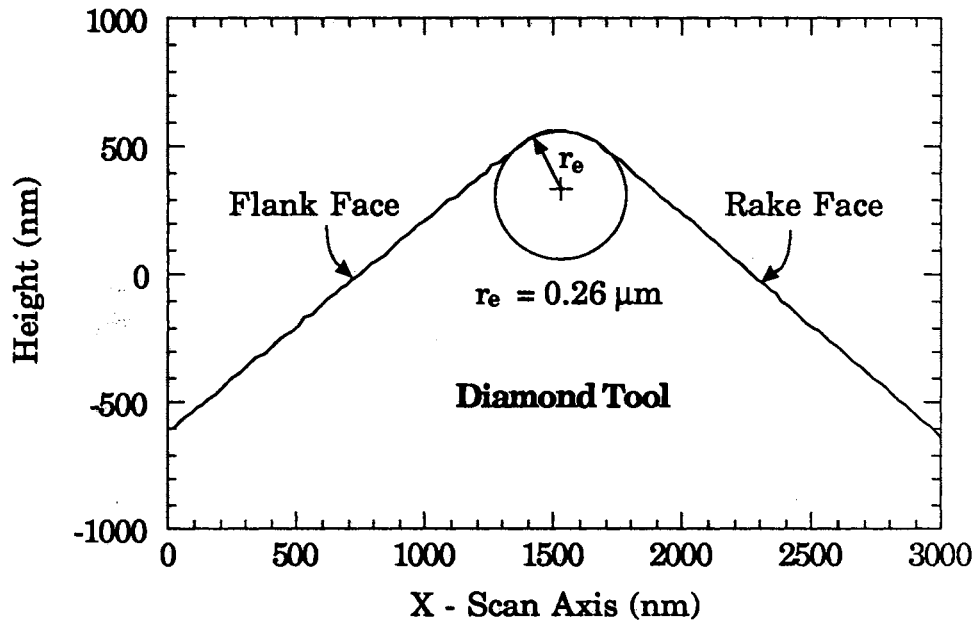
Measured Tool Edge Profile Using AFM for -20° Rake Angle Tool (Tool C)
